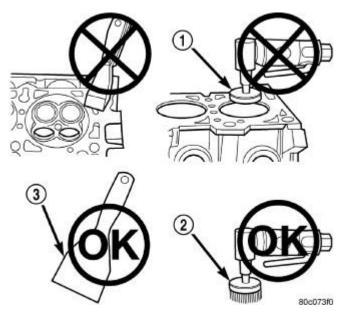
Proper Tool Usage For Surface Preparation Courtesy of CHRYSLER LLC
